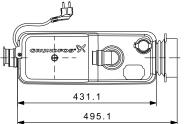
Dimensional drawings, Sololift2 CWC-3
